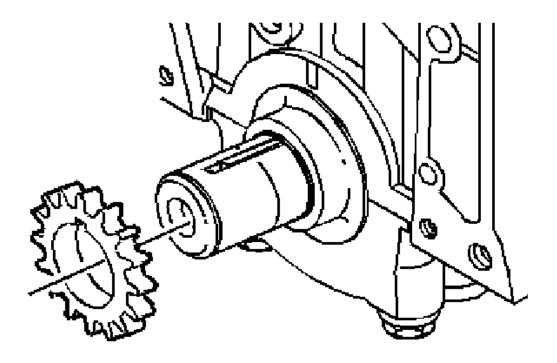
View Of Crankshaft Sprocket Courtesy of GENERAL MOTORS CORP.
